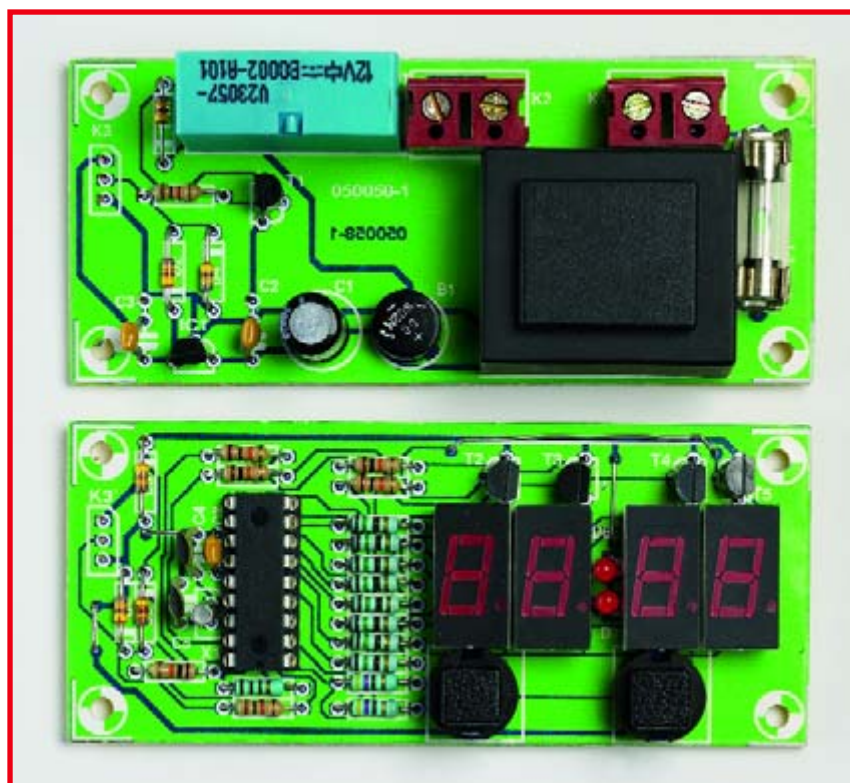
The prototype shown here differs slightly from the final printed circuit boards.
